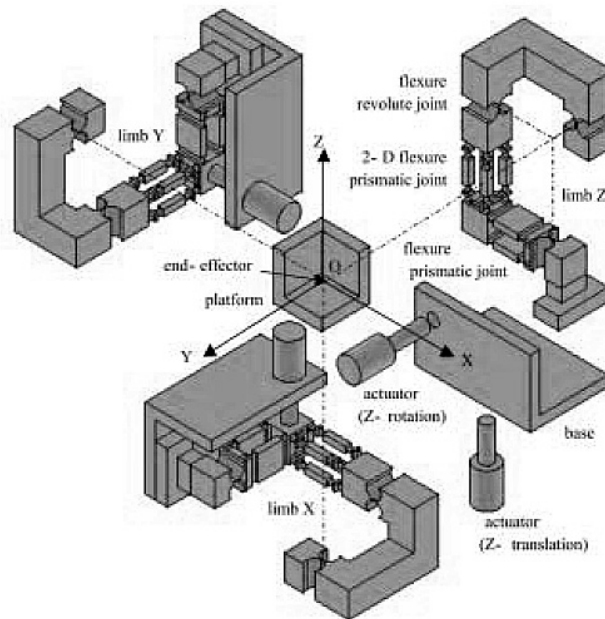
Exploded view of the 6-DOF manipulator [74]
